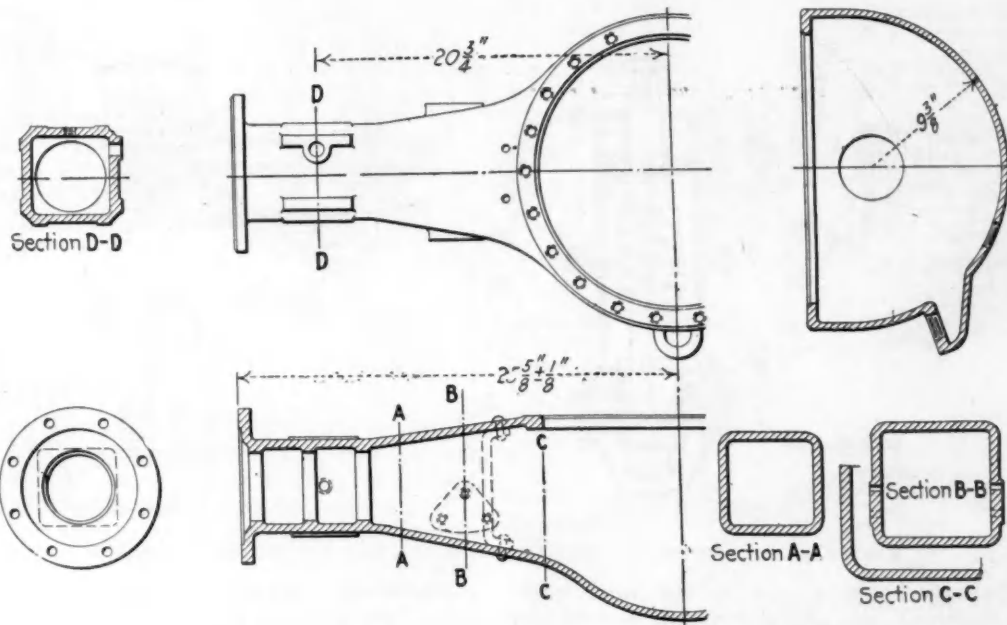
DETAIL OF THE CAST STEEL AXLE HOUSING
